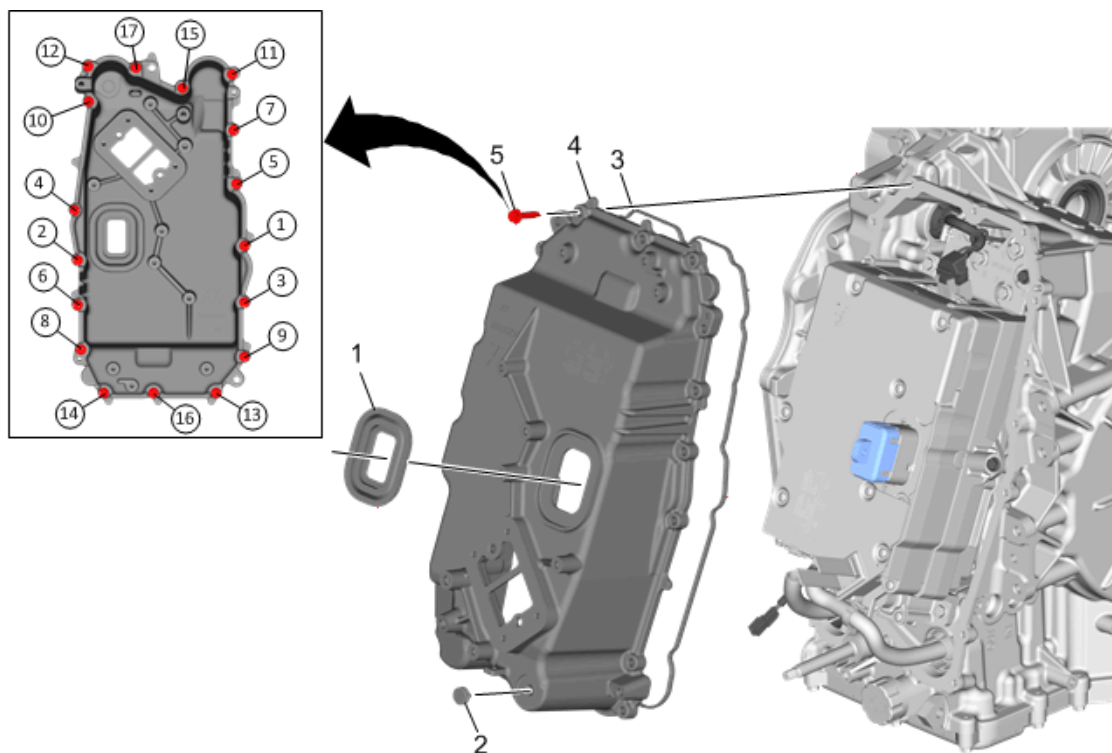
Drive Motor Power Inverter Module Cover (With Bolt Tightening Sequence)
